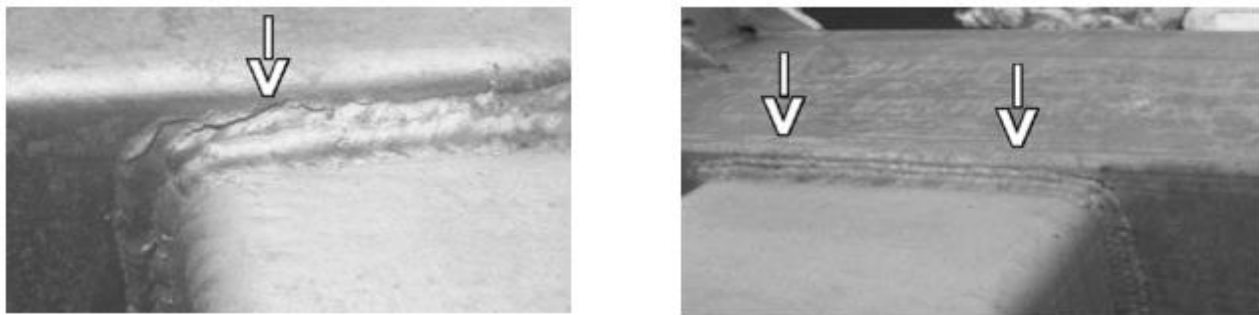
Cracking in the Heat Affected Zone (HAZ) circumferential weld [20]
